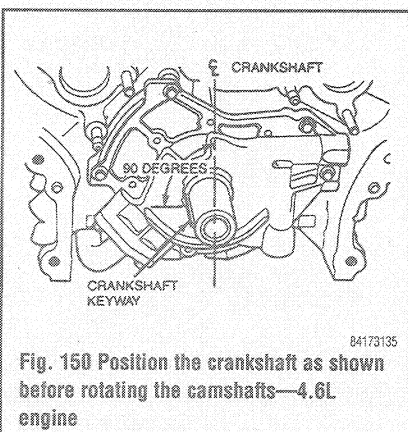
Position the crankshaft as shown before rotating the camshafts—4.6L engine
